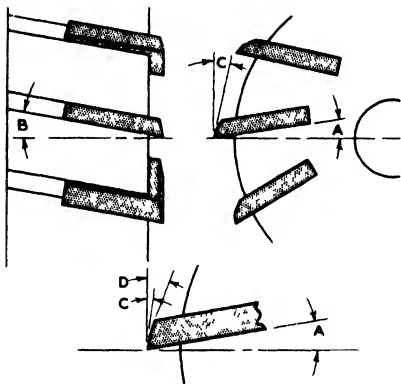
Detail of Rakes and Clearances of Milling Cutter. A is the Radial Rake, B the Axial, C is the Primary Clearance, and the Secondary Clearance is D
